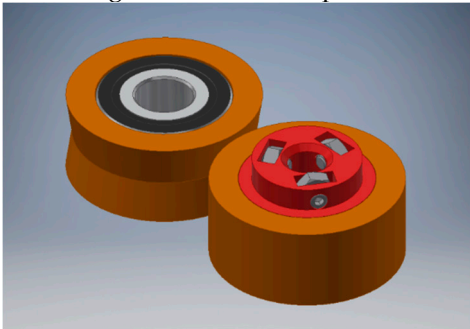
Rendering of Ninjaflex grabber wheels with nut traps and bearings.
